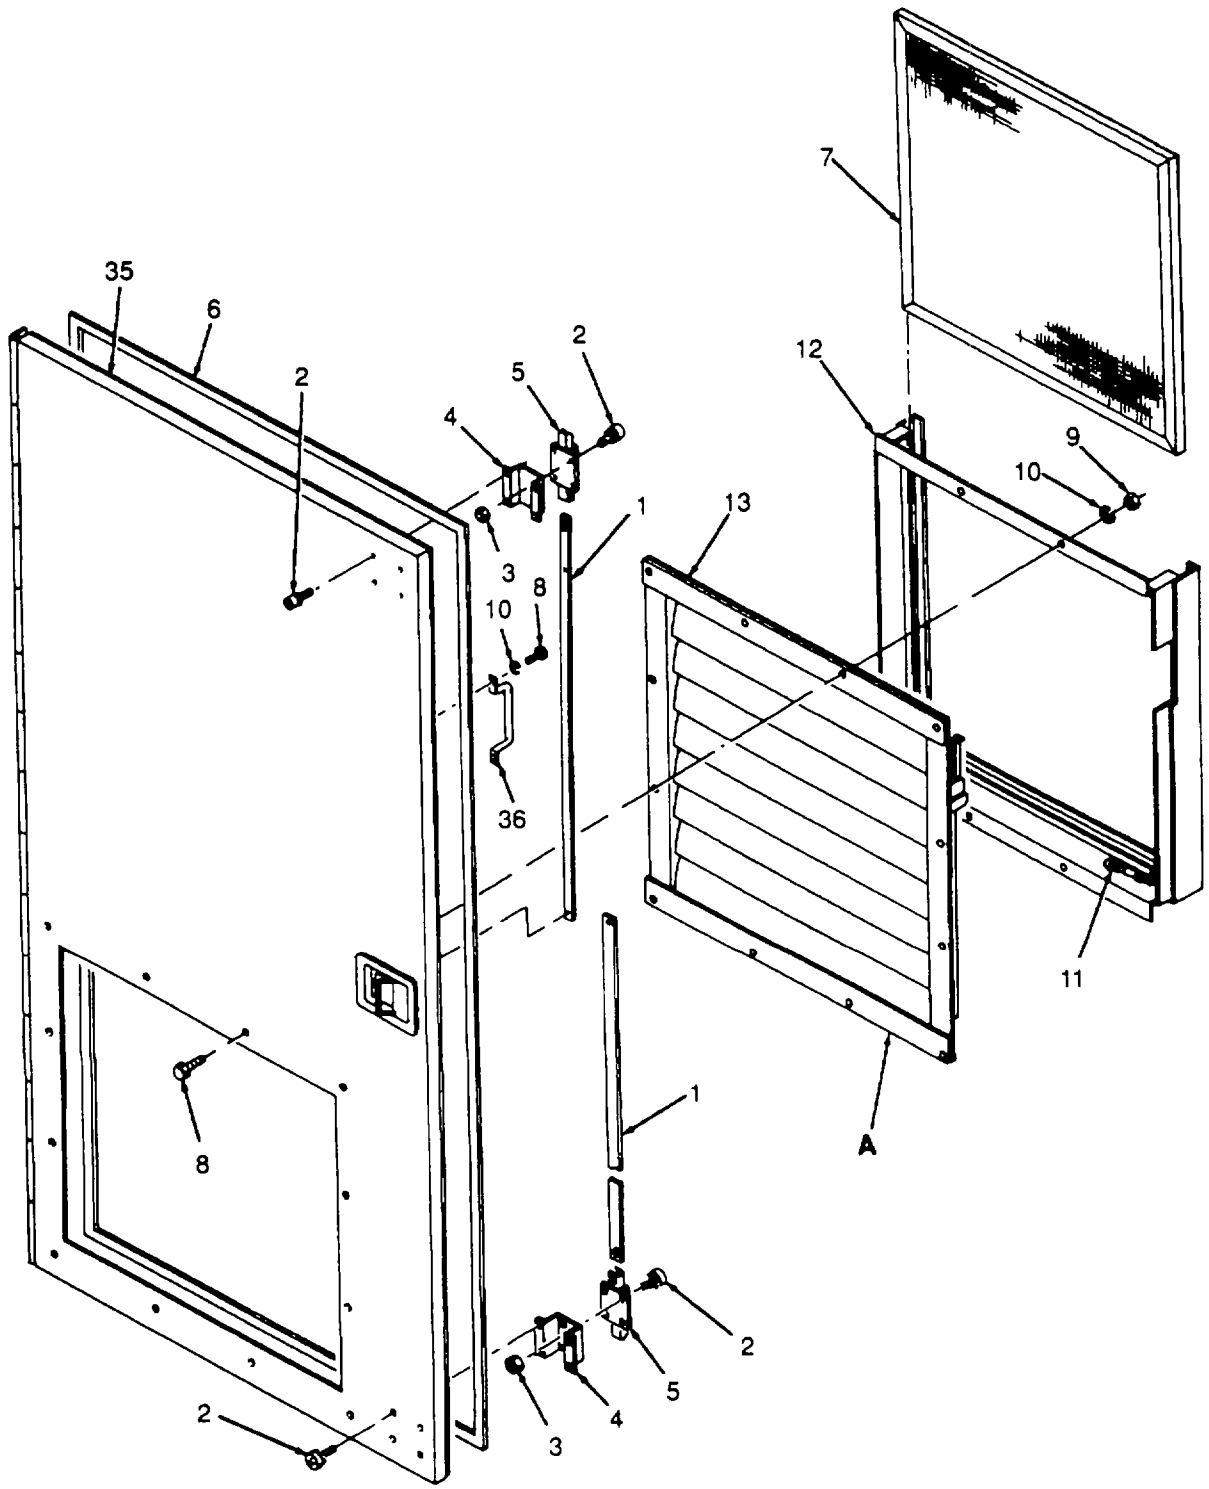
Control Room Door Assembly (Sheet 1 of 3)
